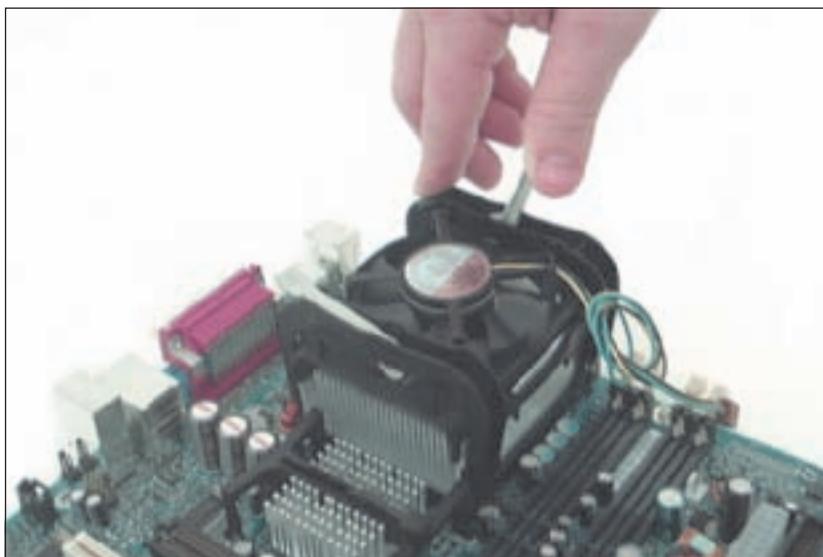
The clip levers attach the cooling assembly to the retention mechanism around the processor
